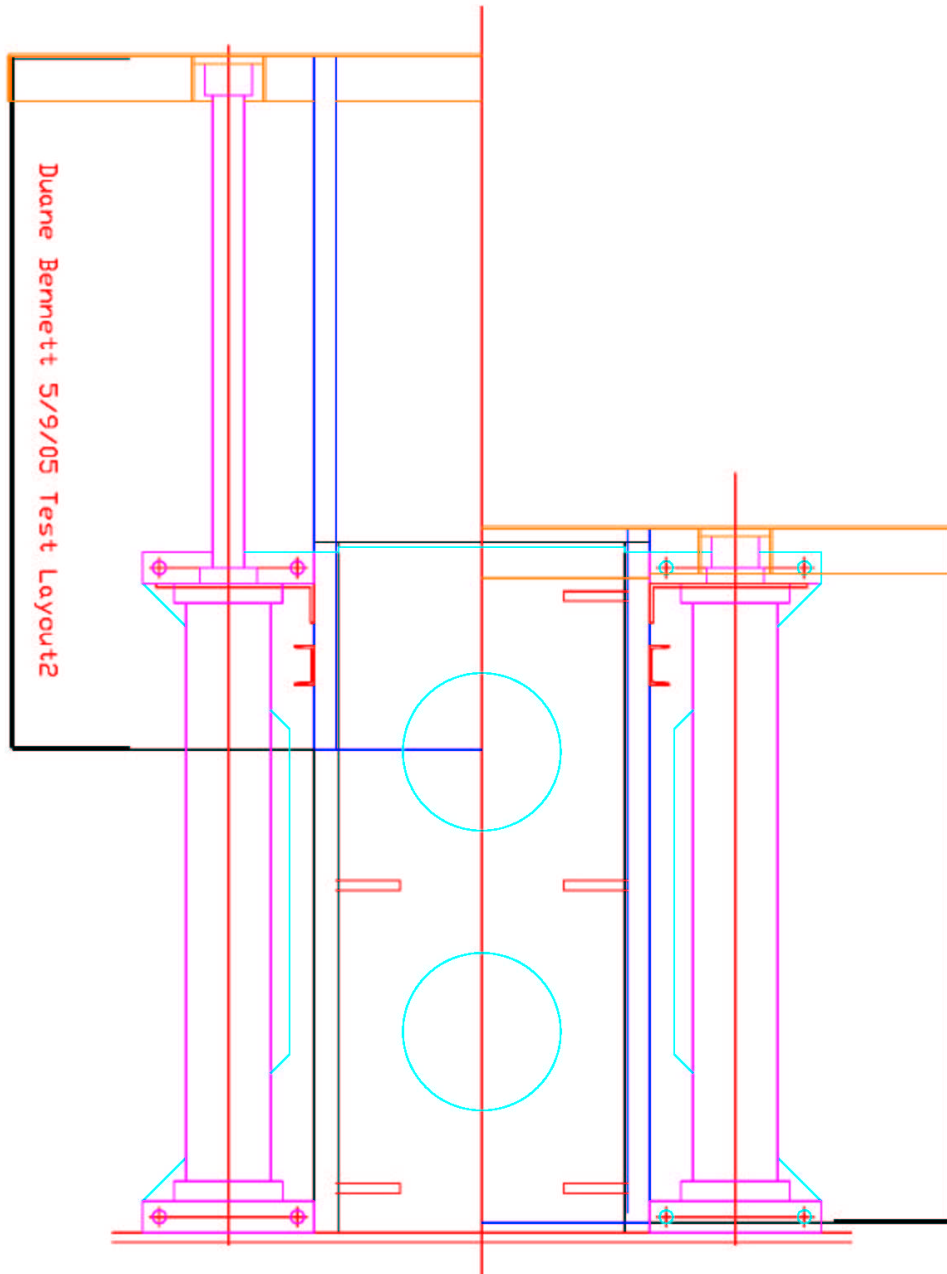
Quarter-scale TMA assembly drawing. (D. Bennett)
